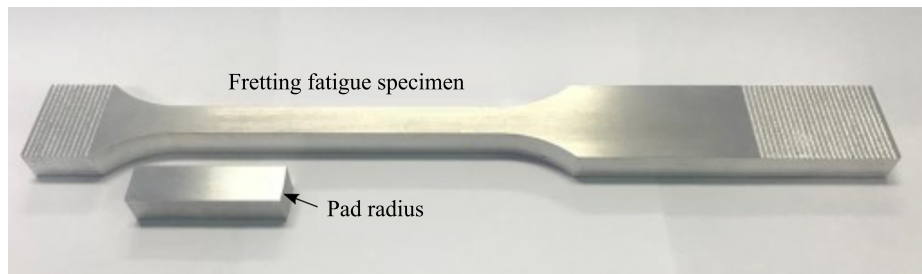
Test Specimen and Pad for a fretting fatigue experiment, dimensions on the Appendix.
